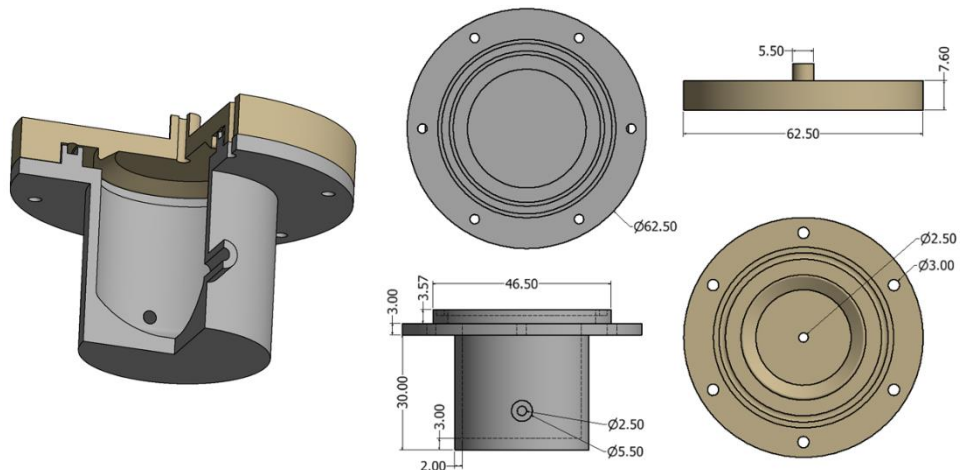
Bioreactor version 1 technical drawings with dimensions in mm. The lid is presented in light brown and the body in grey.
